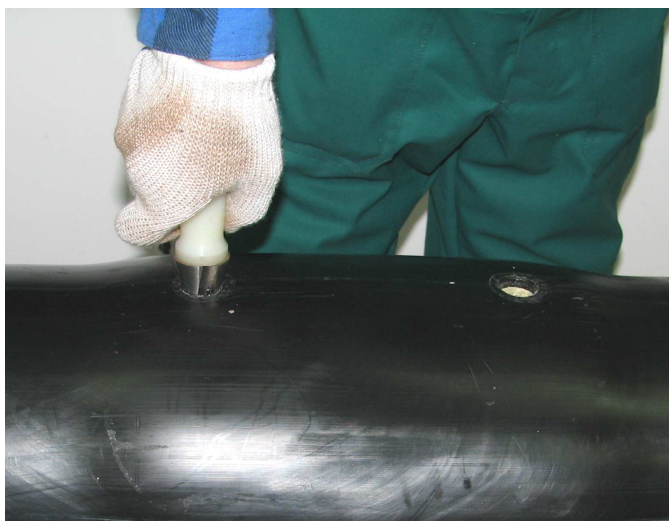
Bevelling of the edges of the filling holes using a manual tapered end mill
